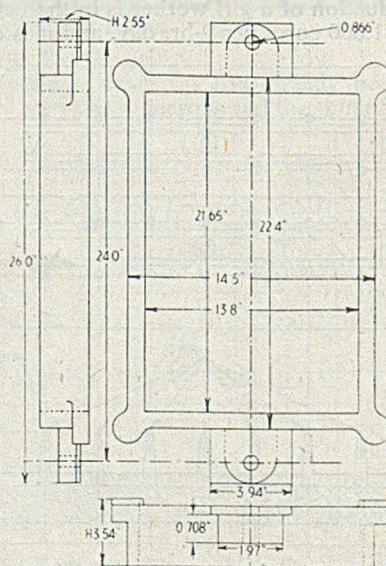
Moulding Box Plan and Elevations showing Principal Dimensions
